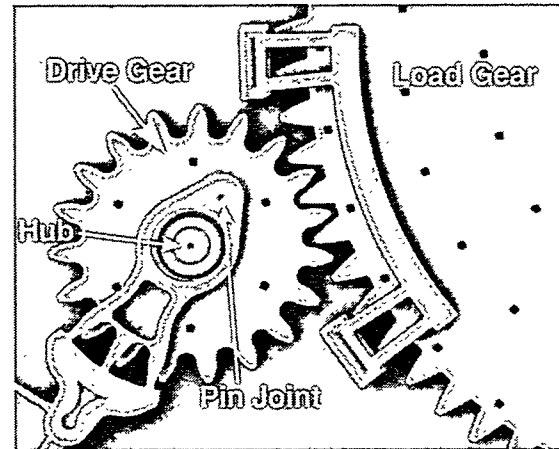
Close-up view of the drive gear meshing with the load gear. The hub is anchored to the substrate and the pin joint connects the actuator linkage to the drive gear.
